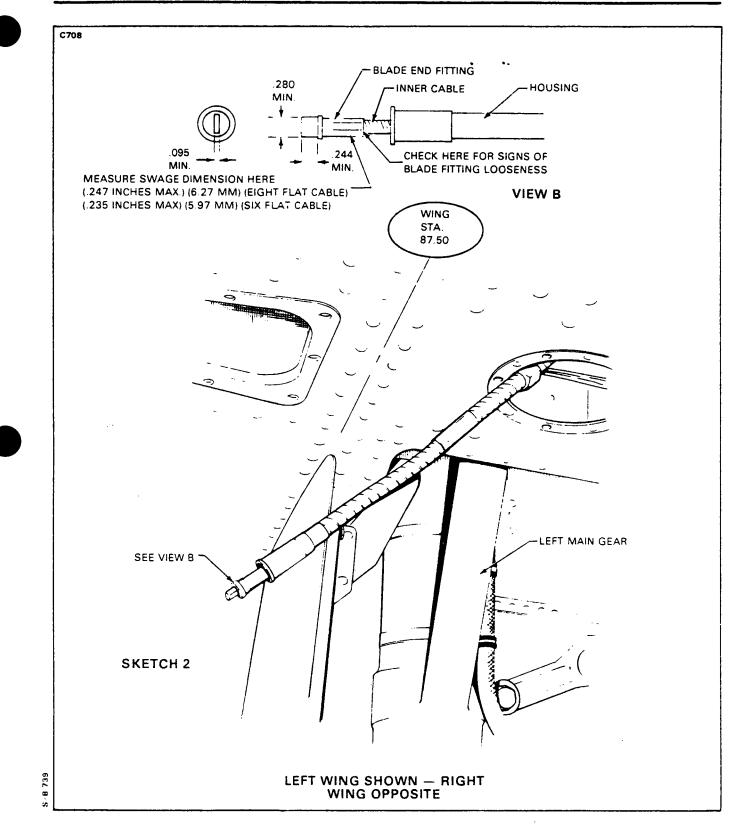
Wing Flap Actuator Cable - 500 Hour Inspection (cont.)
